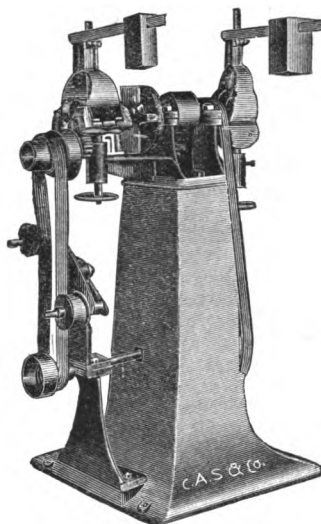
NO. 2 ACME ROD MACHINE. (Power Screw Feed.)
